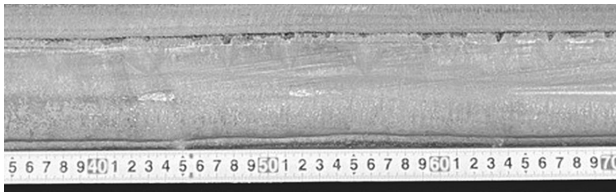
Bead appearance of [T] PF-I80ES / [T] US-80SP welded joint
